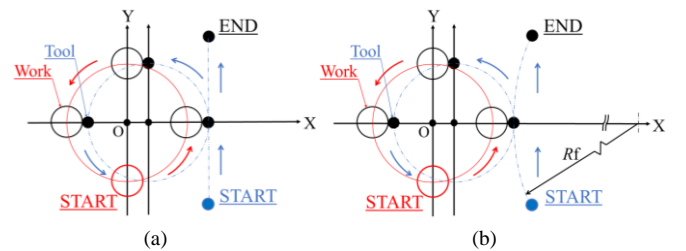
Model of machining path. (a) Straight-line path with a running start. (b) Pseudo-straight-line path with a running start.
